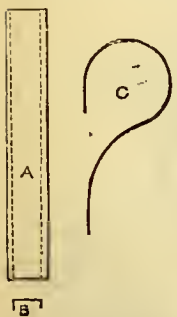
HANDLE OF CUP. A, Strip of Metal. B, Edges turned up. C, Shape when bent.
